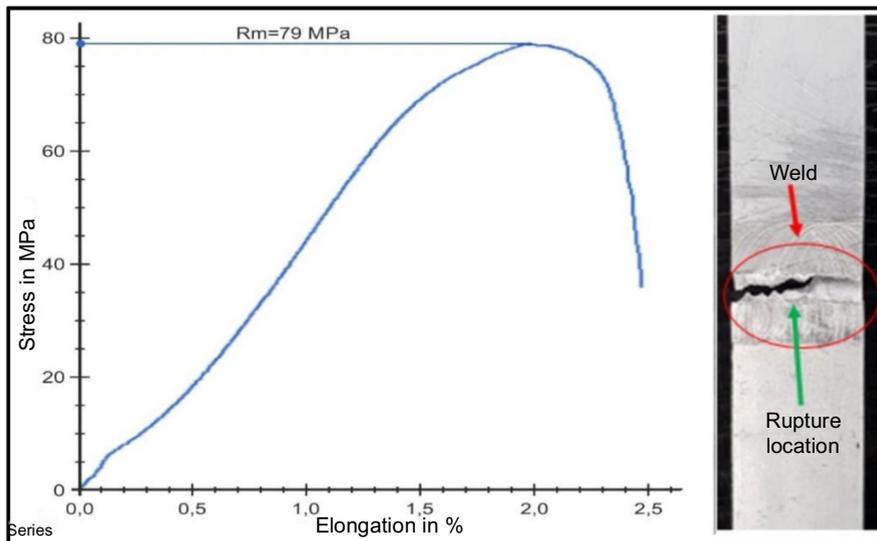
SPI weld sample no. 1 tensile test results – sample was ruptured at the weld location
